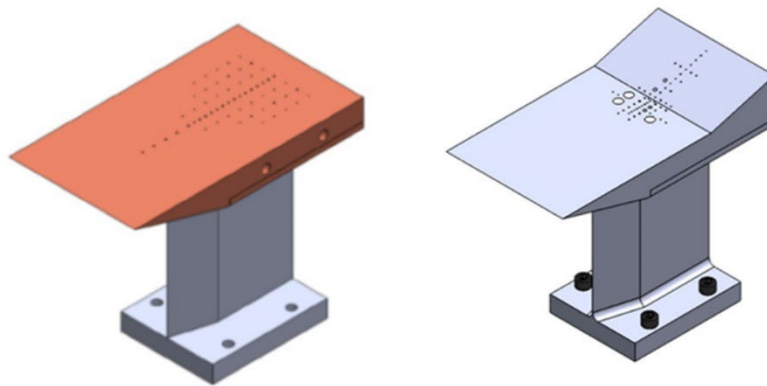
Flat plate (copper) and compression ramp (stainless steel) mounted on wind tunnel strut.
